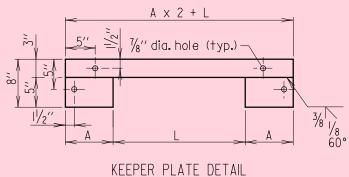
DETAIL NO. SR-BR-302 SHEET ___ OF_2
